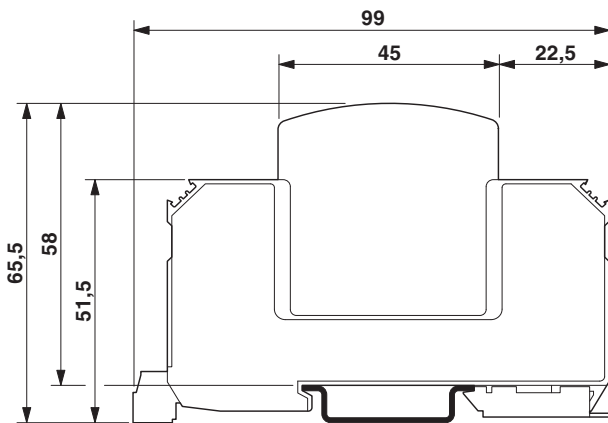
The illustration shows the dimensional drawing for a version with remote indicator contact
